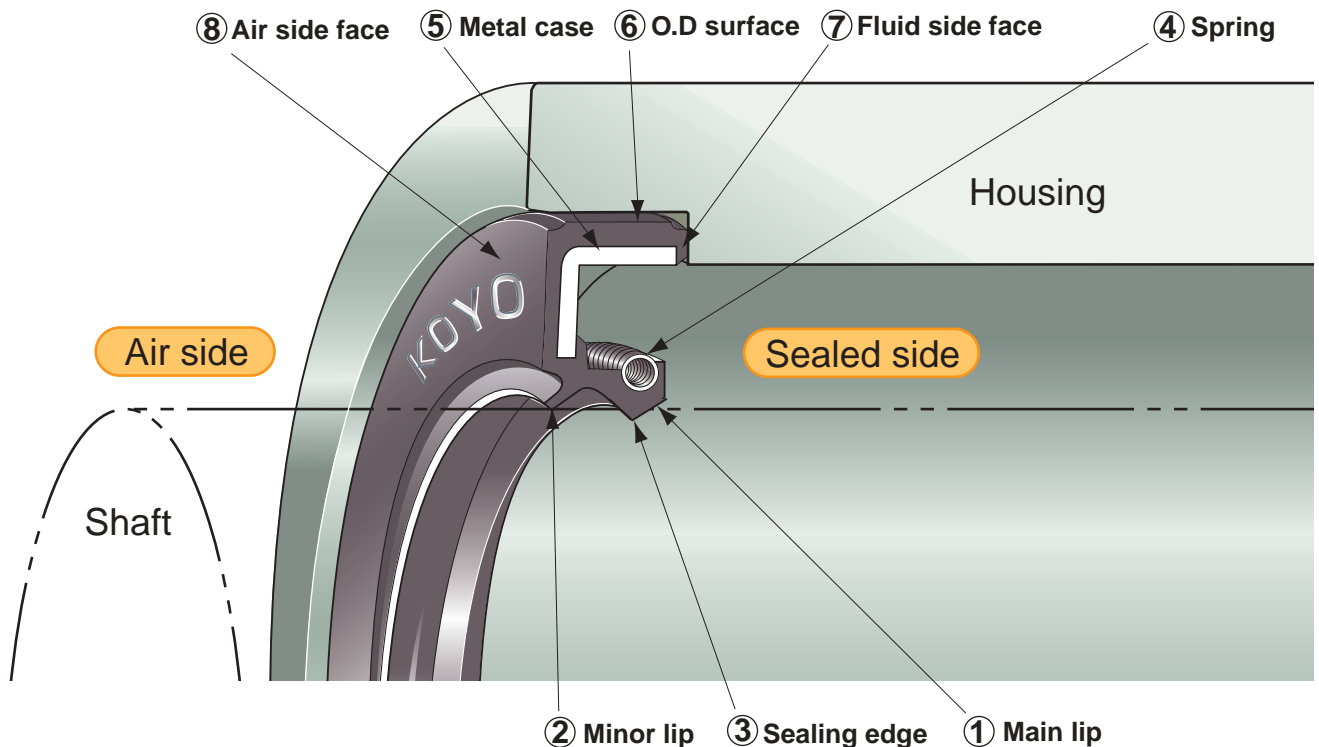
Typically shaped oil seal and component nomenclature
